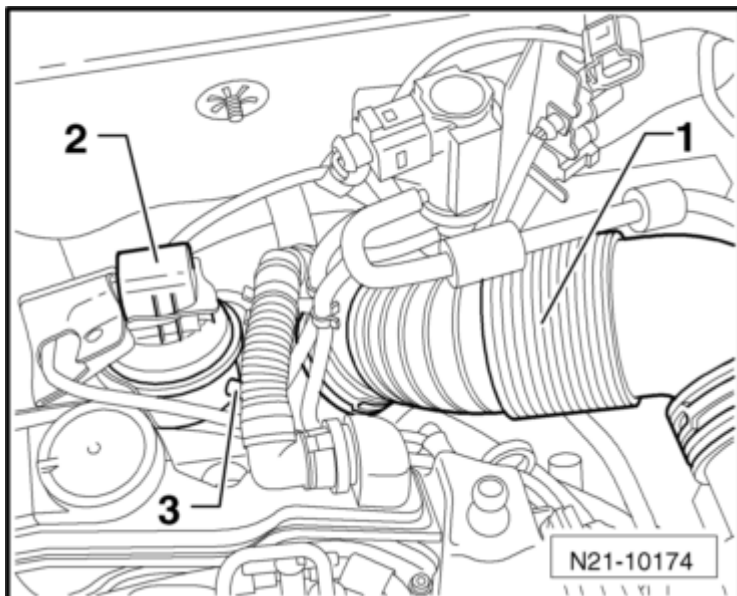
Identifying Connector To Charge Pressure Actuator Position Sensor -G581- -2- And Vacuum Hose -3-
